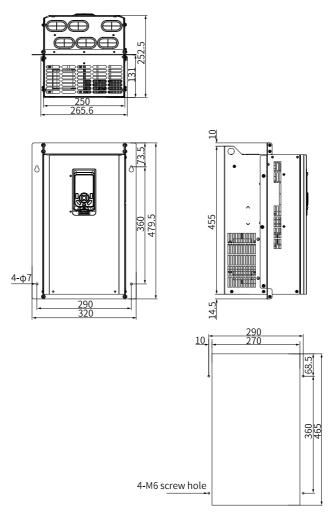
Mounting-hole dimensions (mm) of MD580-AZJ-A2T6
